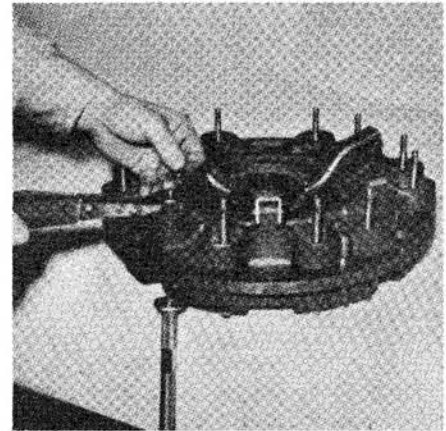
Compress pressure springs with valve spring compressor to remove retainers.
